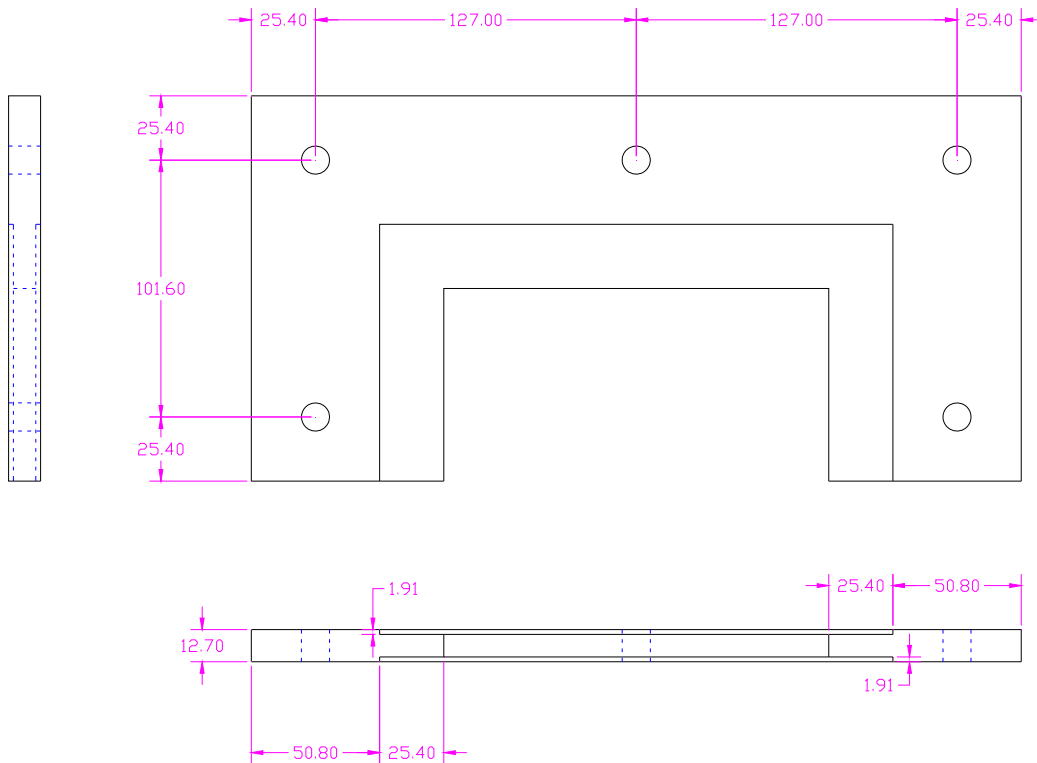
Design drawing for part #4, a total of four pieces (all values are in mm)
